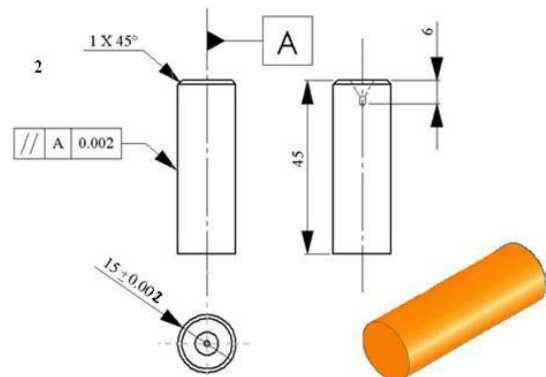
Dimensional size and geometrical tolerance of tool
